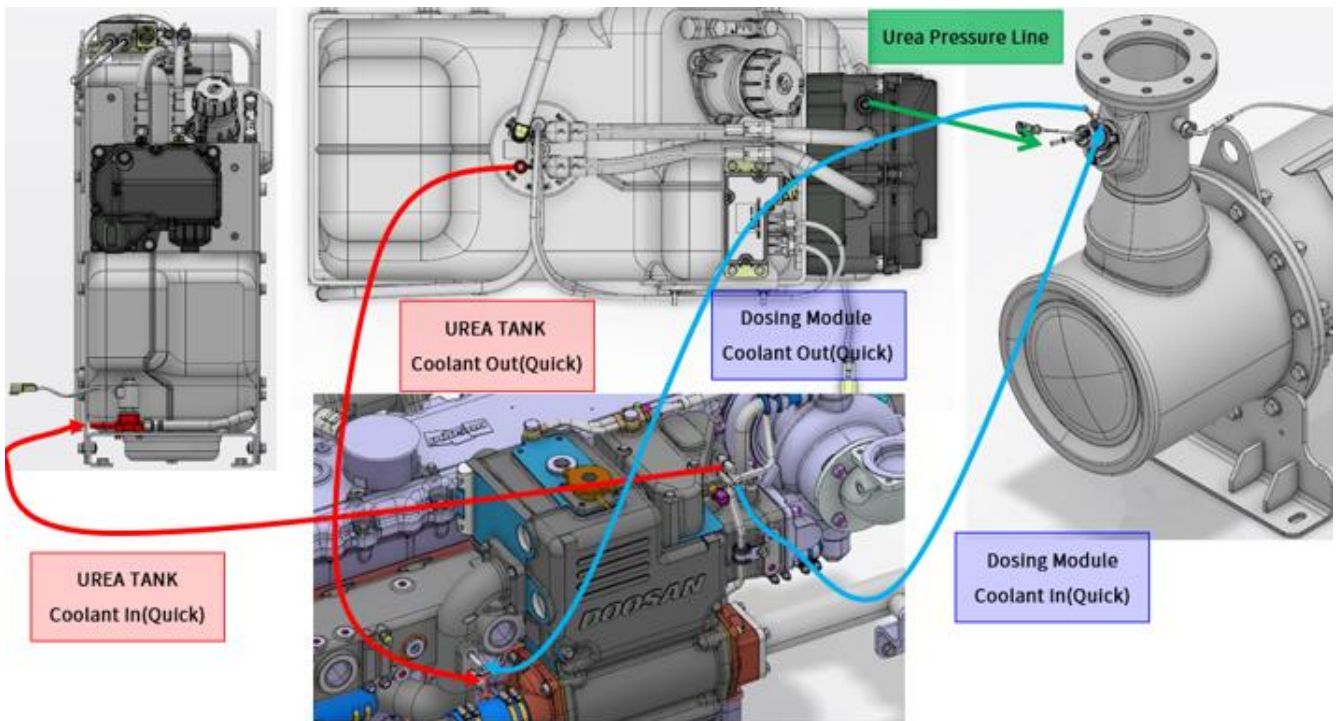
Urea Tank heating & Dosing Module cooling Hose connection (DL06)
